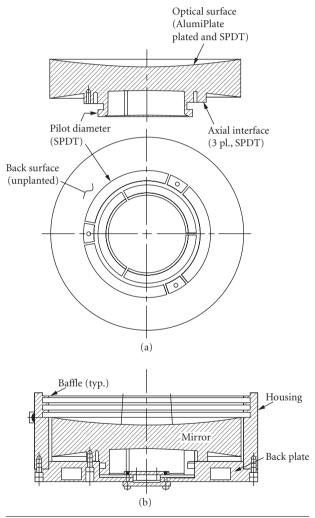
Optomechanical configuration (b) of an aluminum mirror (a) with optical and mounting surfaces machined by SPDT methods. The radial and axial interfaces are shown. (From Vukobratovich et al.30)
